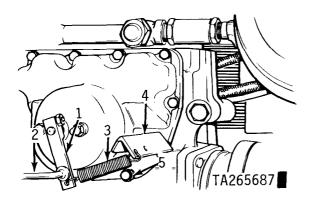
Oil filler tube upper support, model AVDS-1790-2DR engine.
